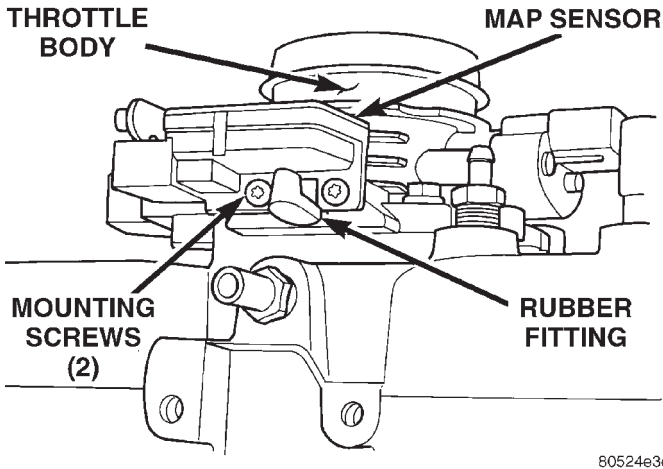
Rubber L-Shaped Fitting—MAP Sensor-to-Throttle Body
